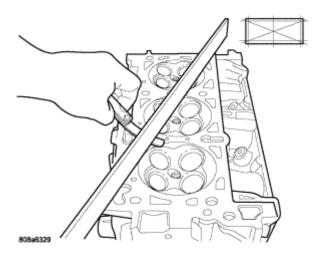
Checking Cylinder Head For Flatness Courtesy of CHRYSLER LLC
